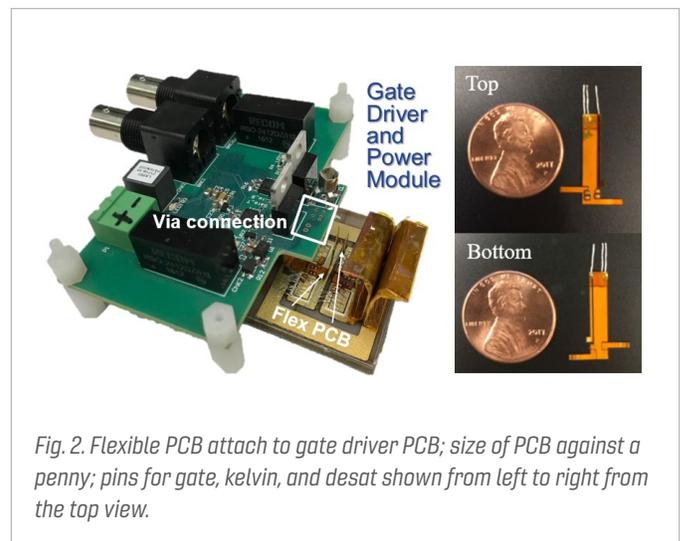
Flexible PCB attach to gate driver PCB; size of PCB against a penny; pins for gate, kelvin, and desat shown from left to right from the top view.
